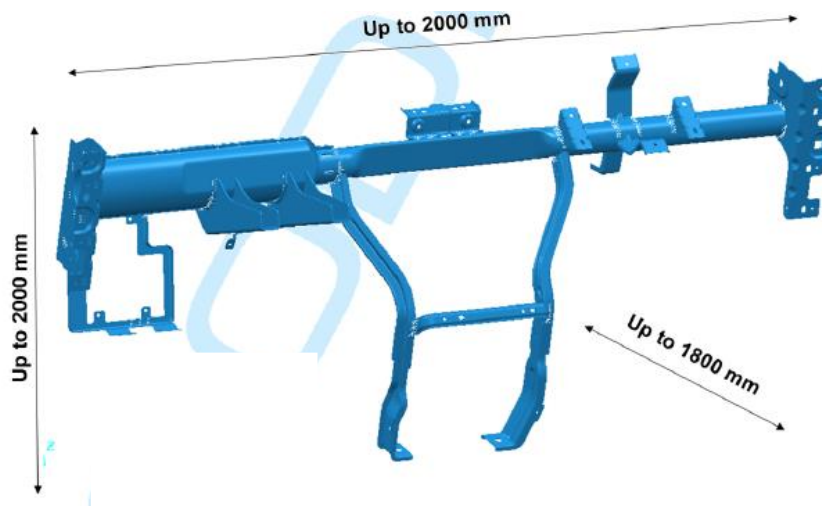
Requirements: Maximum dimensions of the product to be tested
